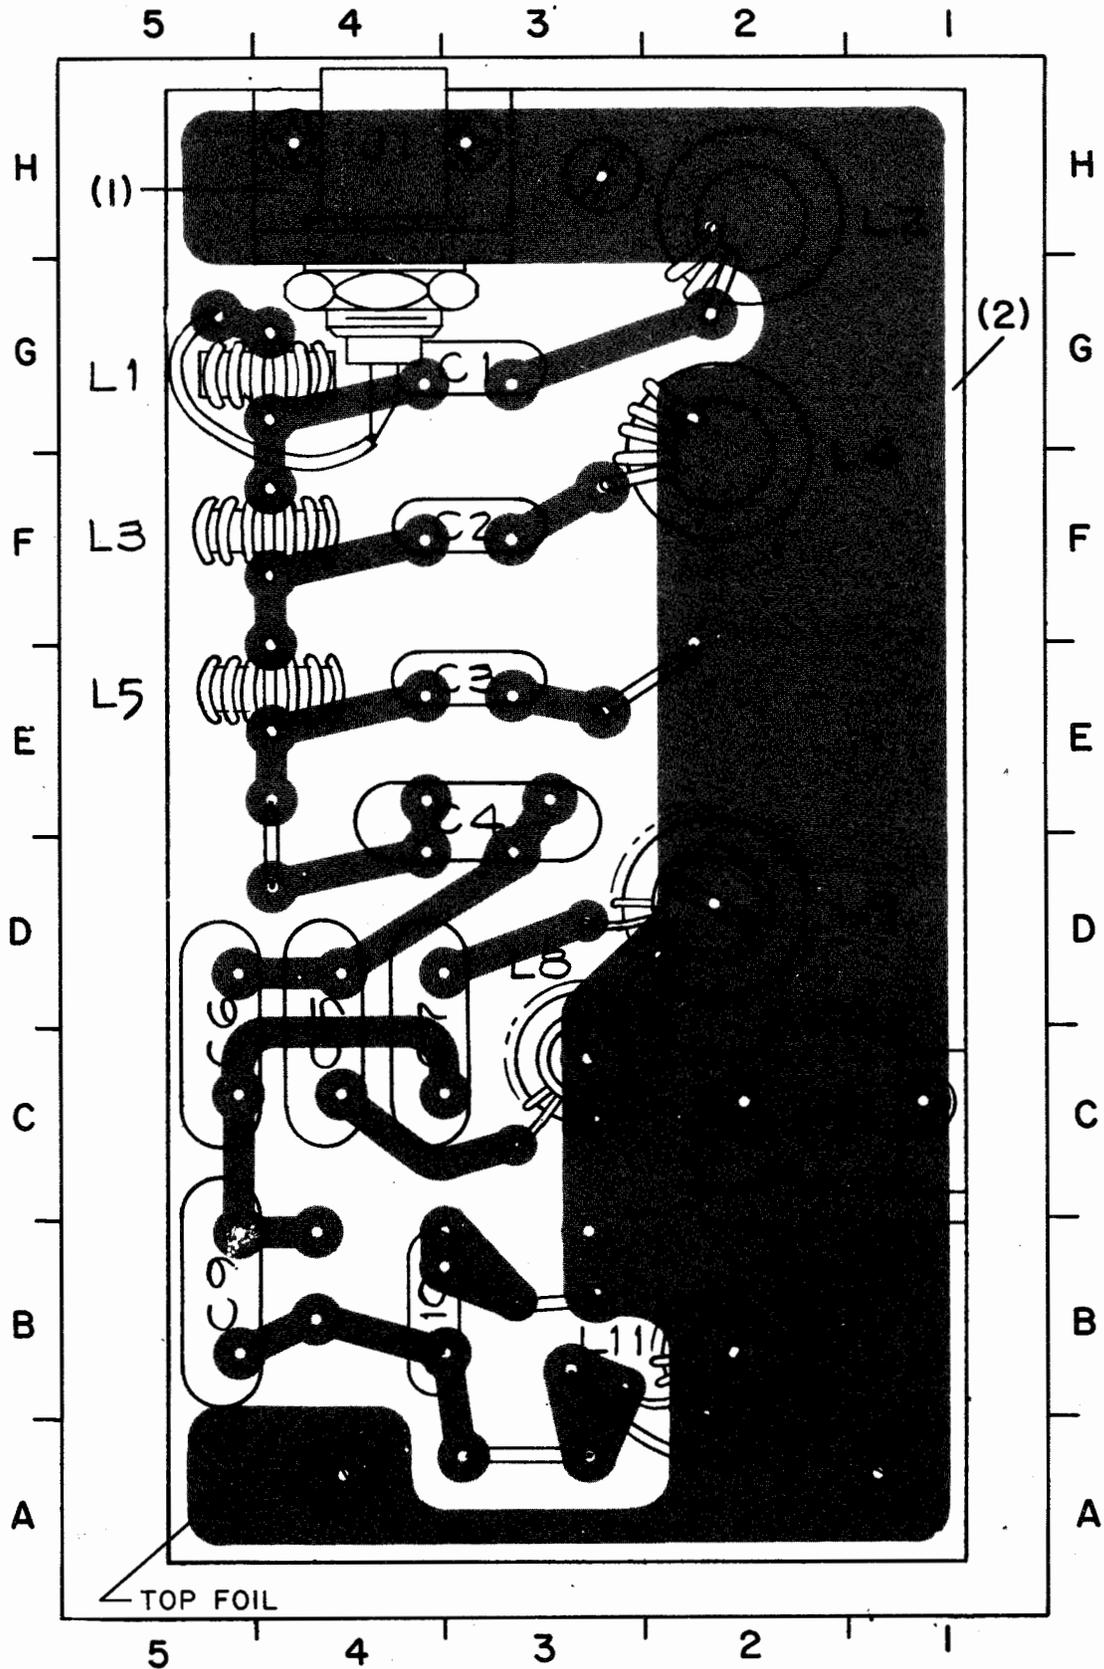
RF Filter, 1A1, 34-0122, Parts Location (Top View) (Sheet 1 of 2)
